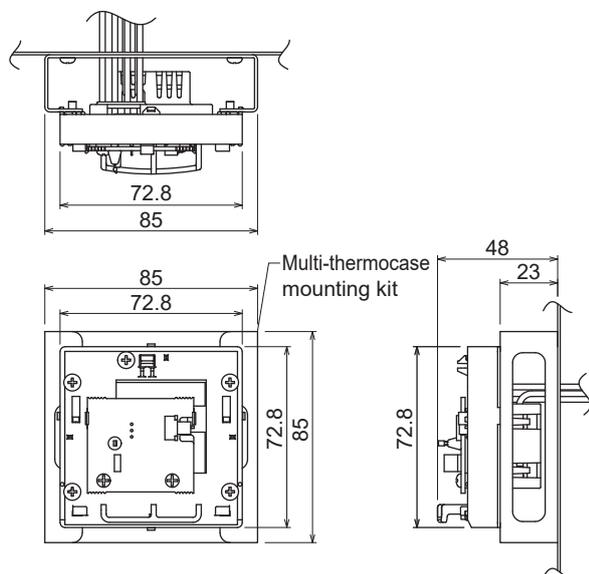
Dimensions when mounted in the Multi-thermocase mounting kit (mm)
